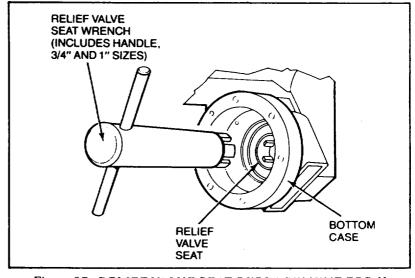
B. RELIEF VALVE SEAT REPLACEMENT FRP-II
